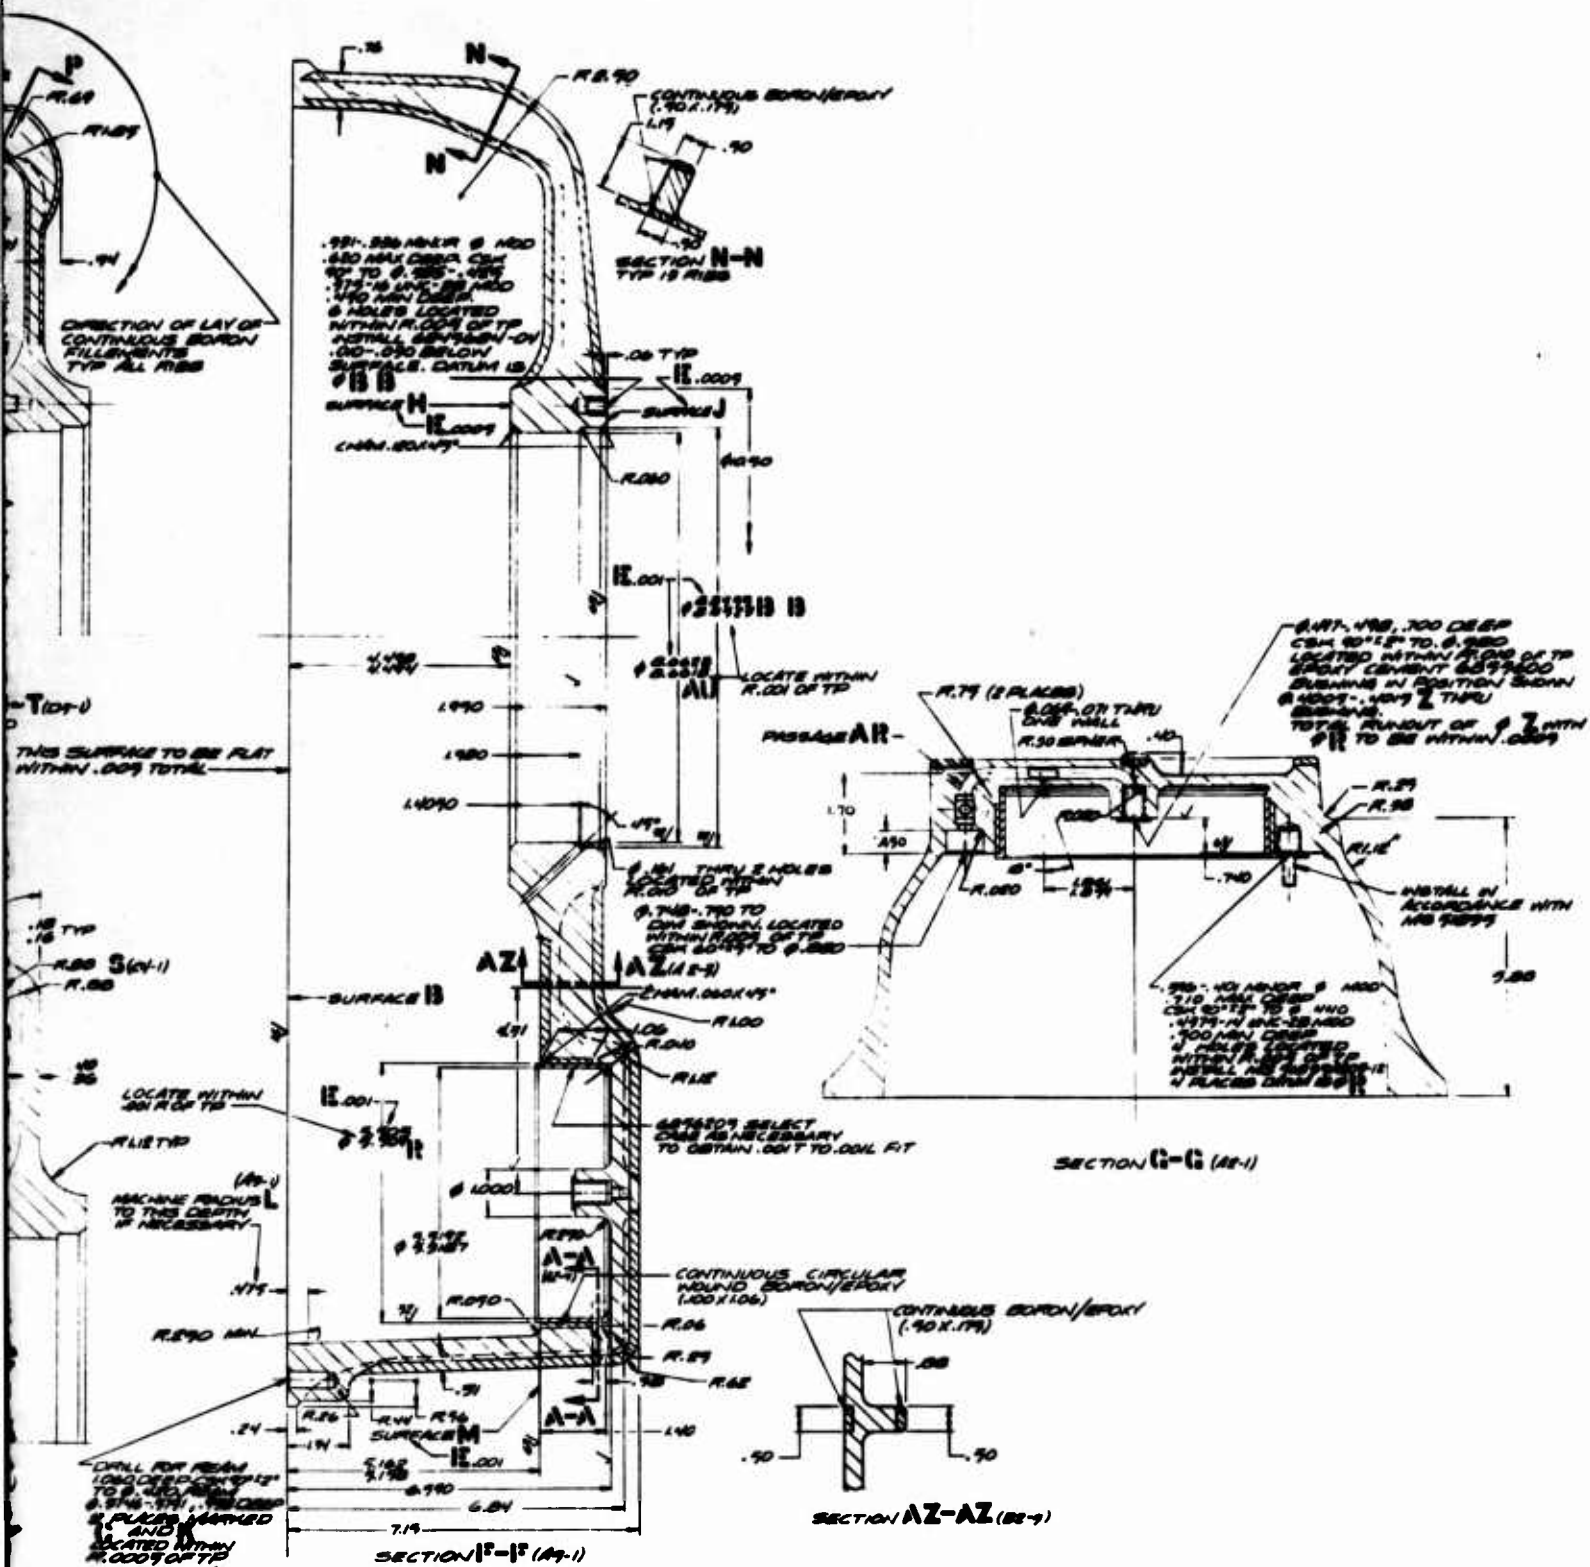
T56-A-18 reduction gear composite material front gear case details.
